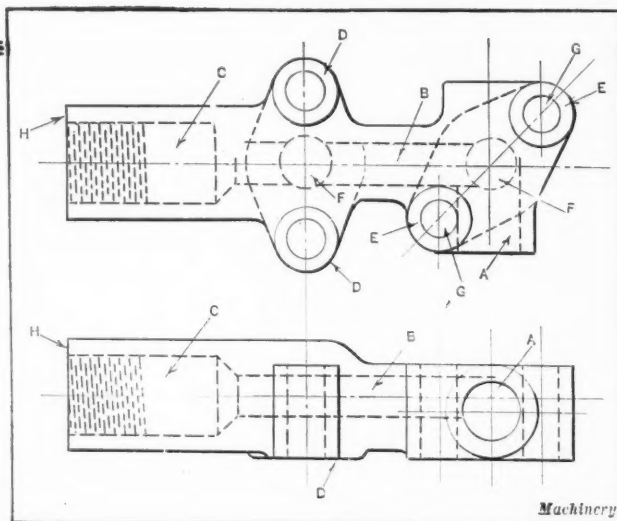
Body of Relief Valve for which Jigs shown in Figs. 2, 3, and 4 were designed
